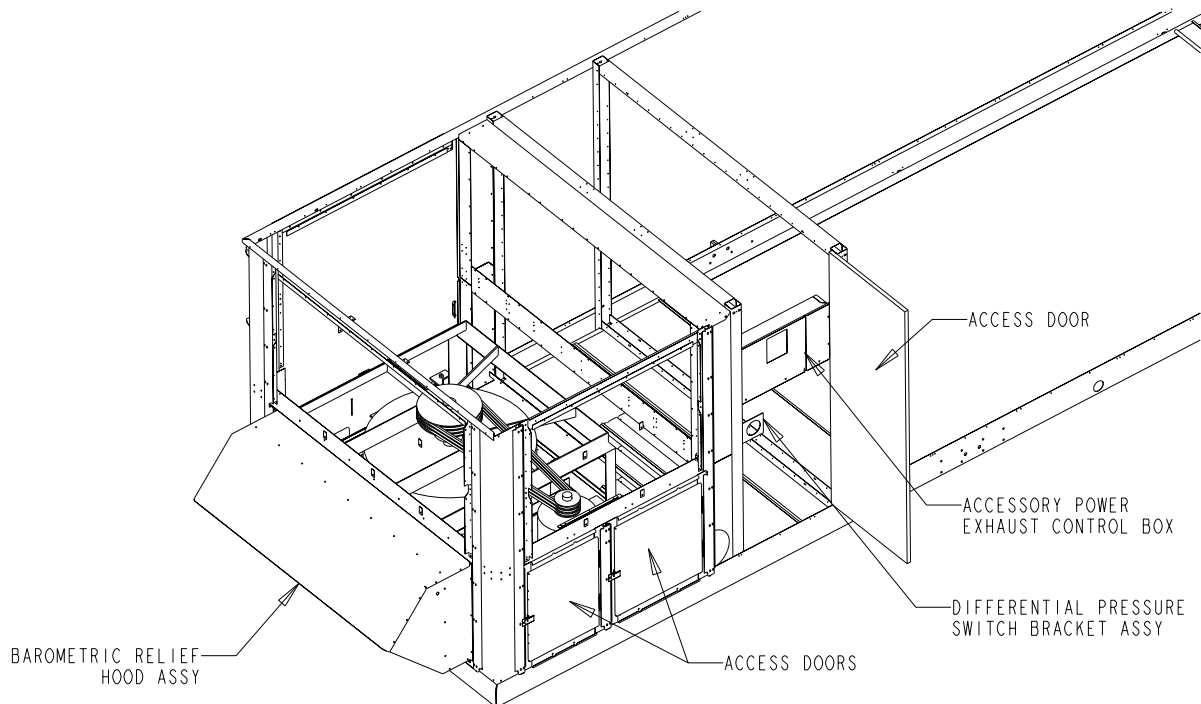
Modulating Power Exhaust Return End Sheet Metal Skin Detail; Sizes 030-050
